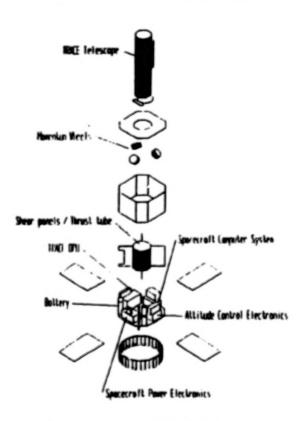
AN EXPLODED VIEW OF THE TRACE INSTRUMENT AND SPACECRAFT
